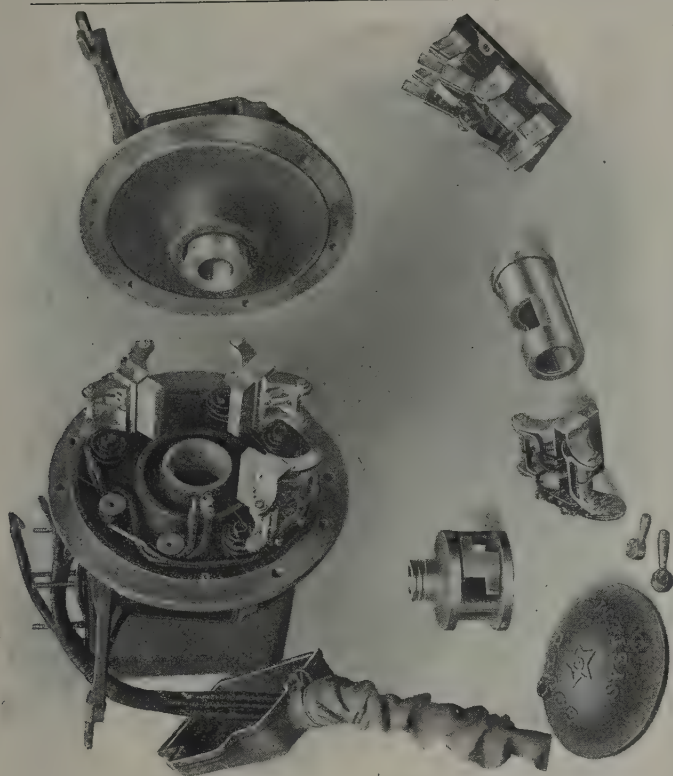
Commutator End Housing Plain Bearing, Waste Packed Type, Pulley End Housing, Trip Carrier with Trip, Commutator End Cap, Lever Nuts, Brush Holder with Brushes, Bearing and Pole Changer Switch.
